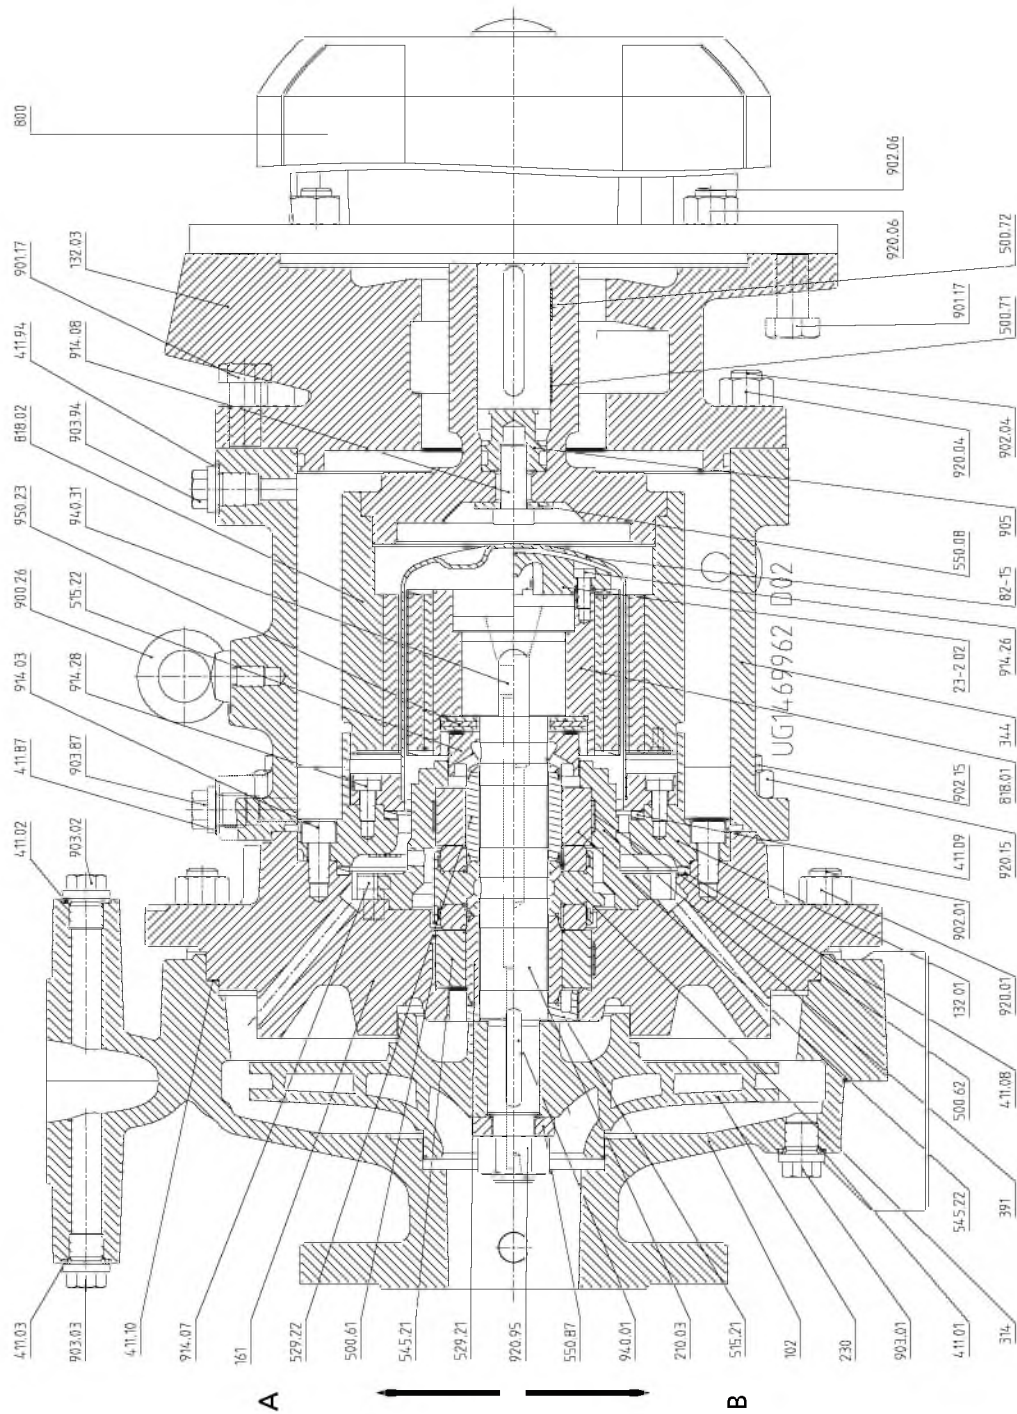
General assembly drawing of model with bolted cover and intermediate piece
